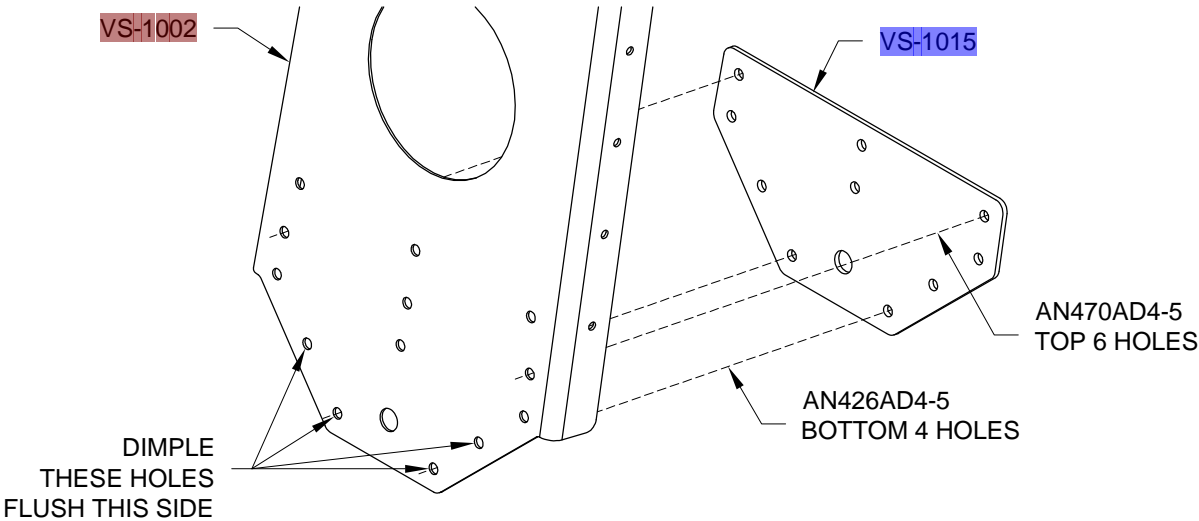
FRONT SPAR DOUBLER ATTACHMENT
